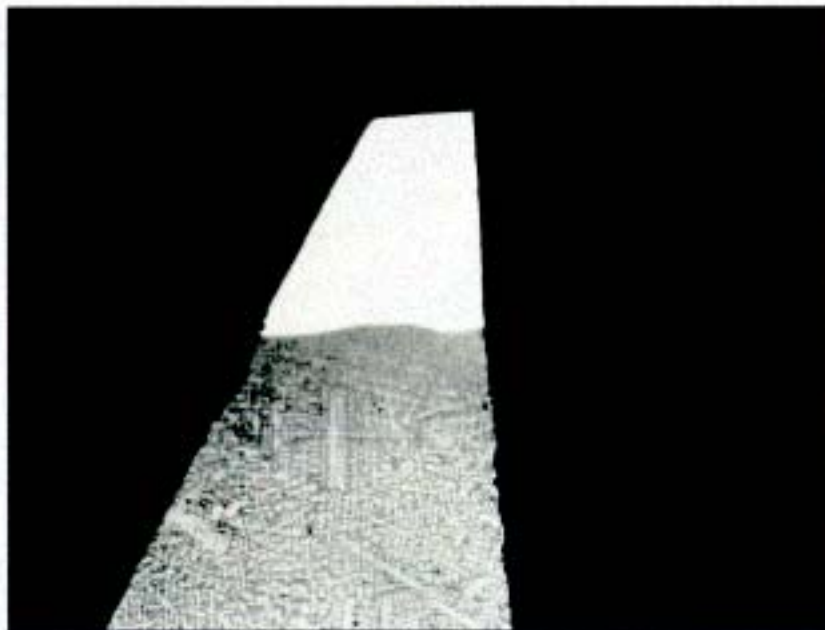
Macrograph x10, etched Nital. Section through forward side valve seat, showing weld overlay and seat face.
